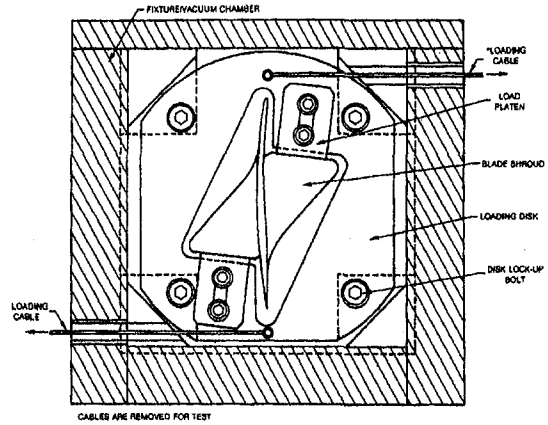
Shroud loading device for investigation of fan blade shroud damping mechanism (Srinivasan et al., 1981)
